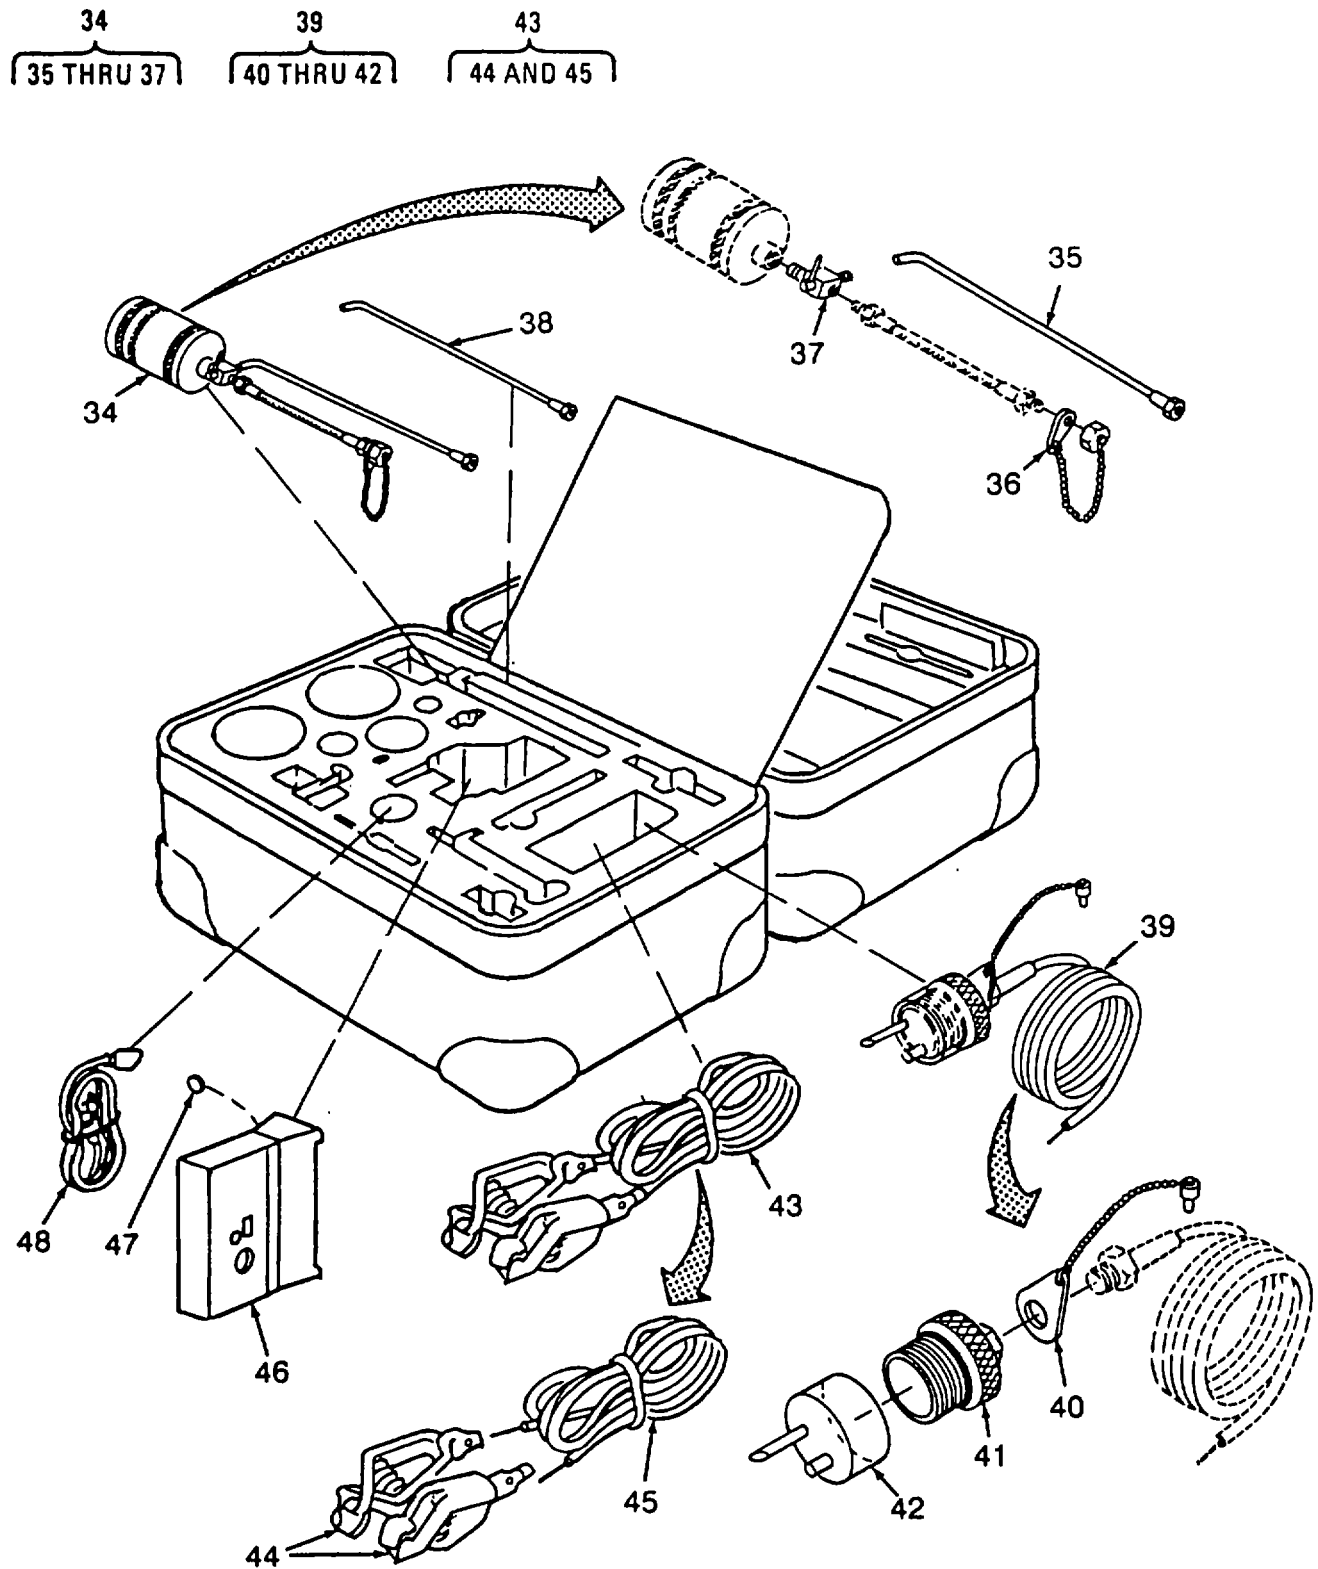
Petroleum Test Kit (Sheet 4 of 5)
